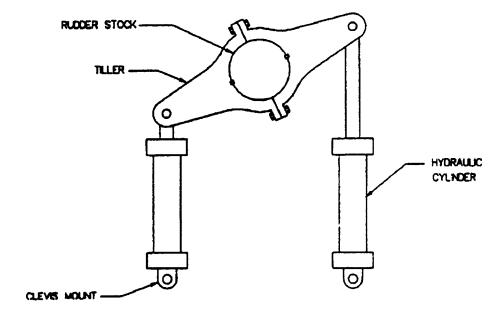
Clevis-mounted Cylinder Arrangement
